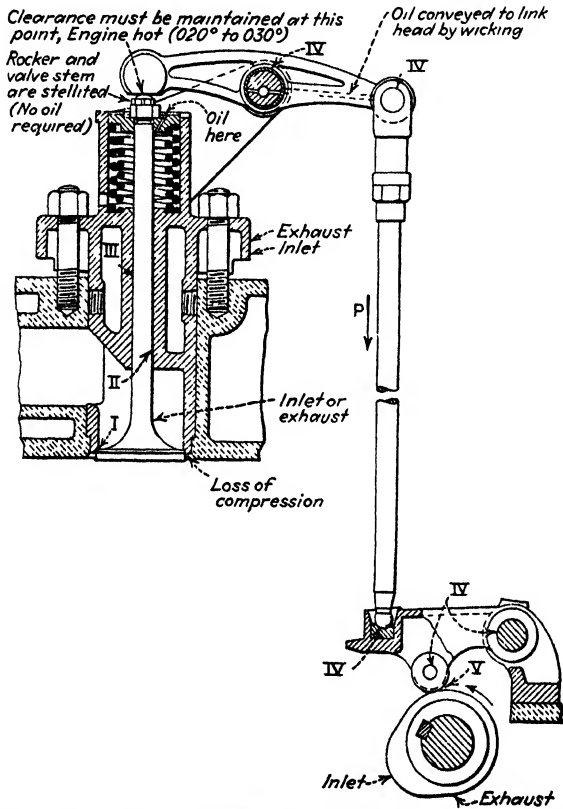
Valve rocker and pushrod of Chicago Pneumatic Tool Diesel.
